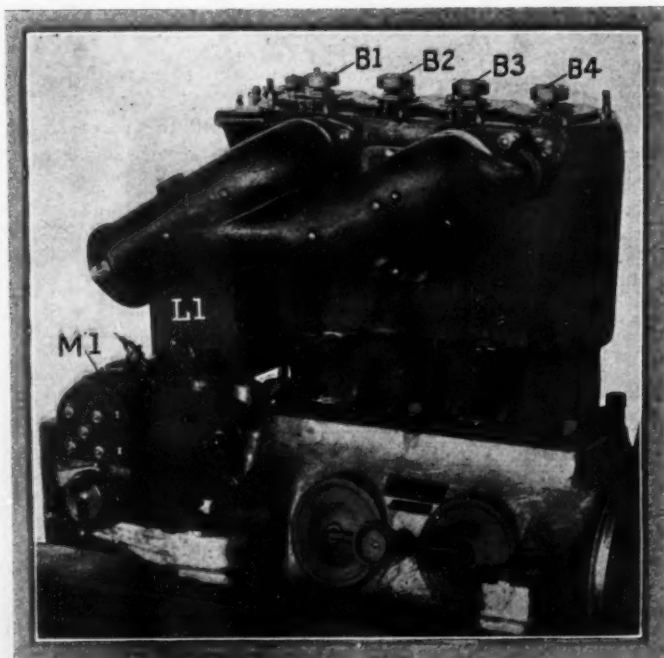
Looking at the left side of the Reynolds rotary valve motor, showing the nesting of the magneto and the train of valve gears
